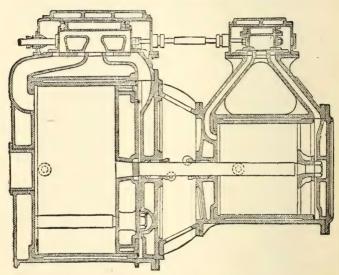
Sectional View of Tandem Compound Cylinders, Showing Arrangement of Steam Chests and Valves.
